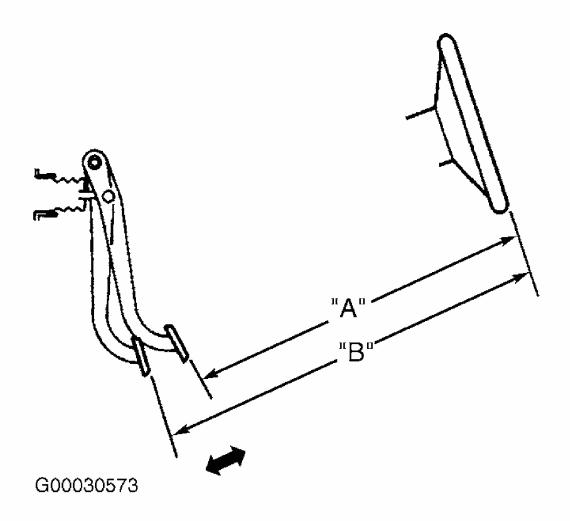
Measuring Brake Pedal Travel Courtesy of GENERAL MOTORS CORP.
